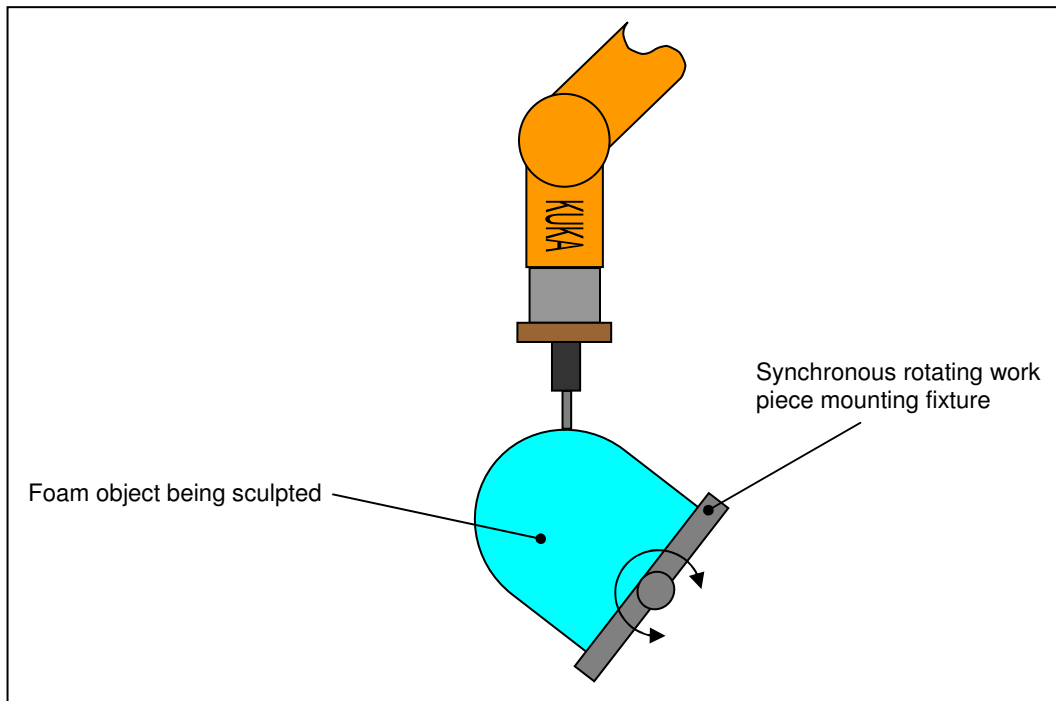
Synchronous auxiliary rotational work piece fixture axis
